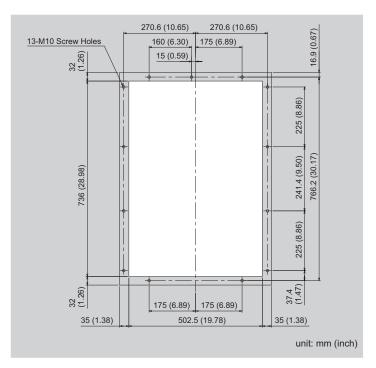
Panel Cut-Out Dimensions (CIMR-A□4T0250U to 0362U)
